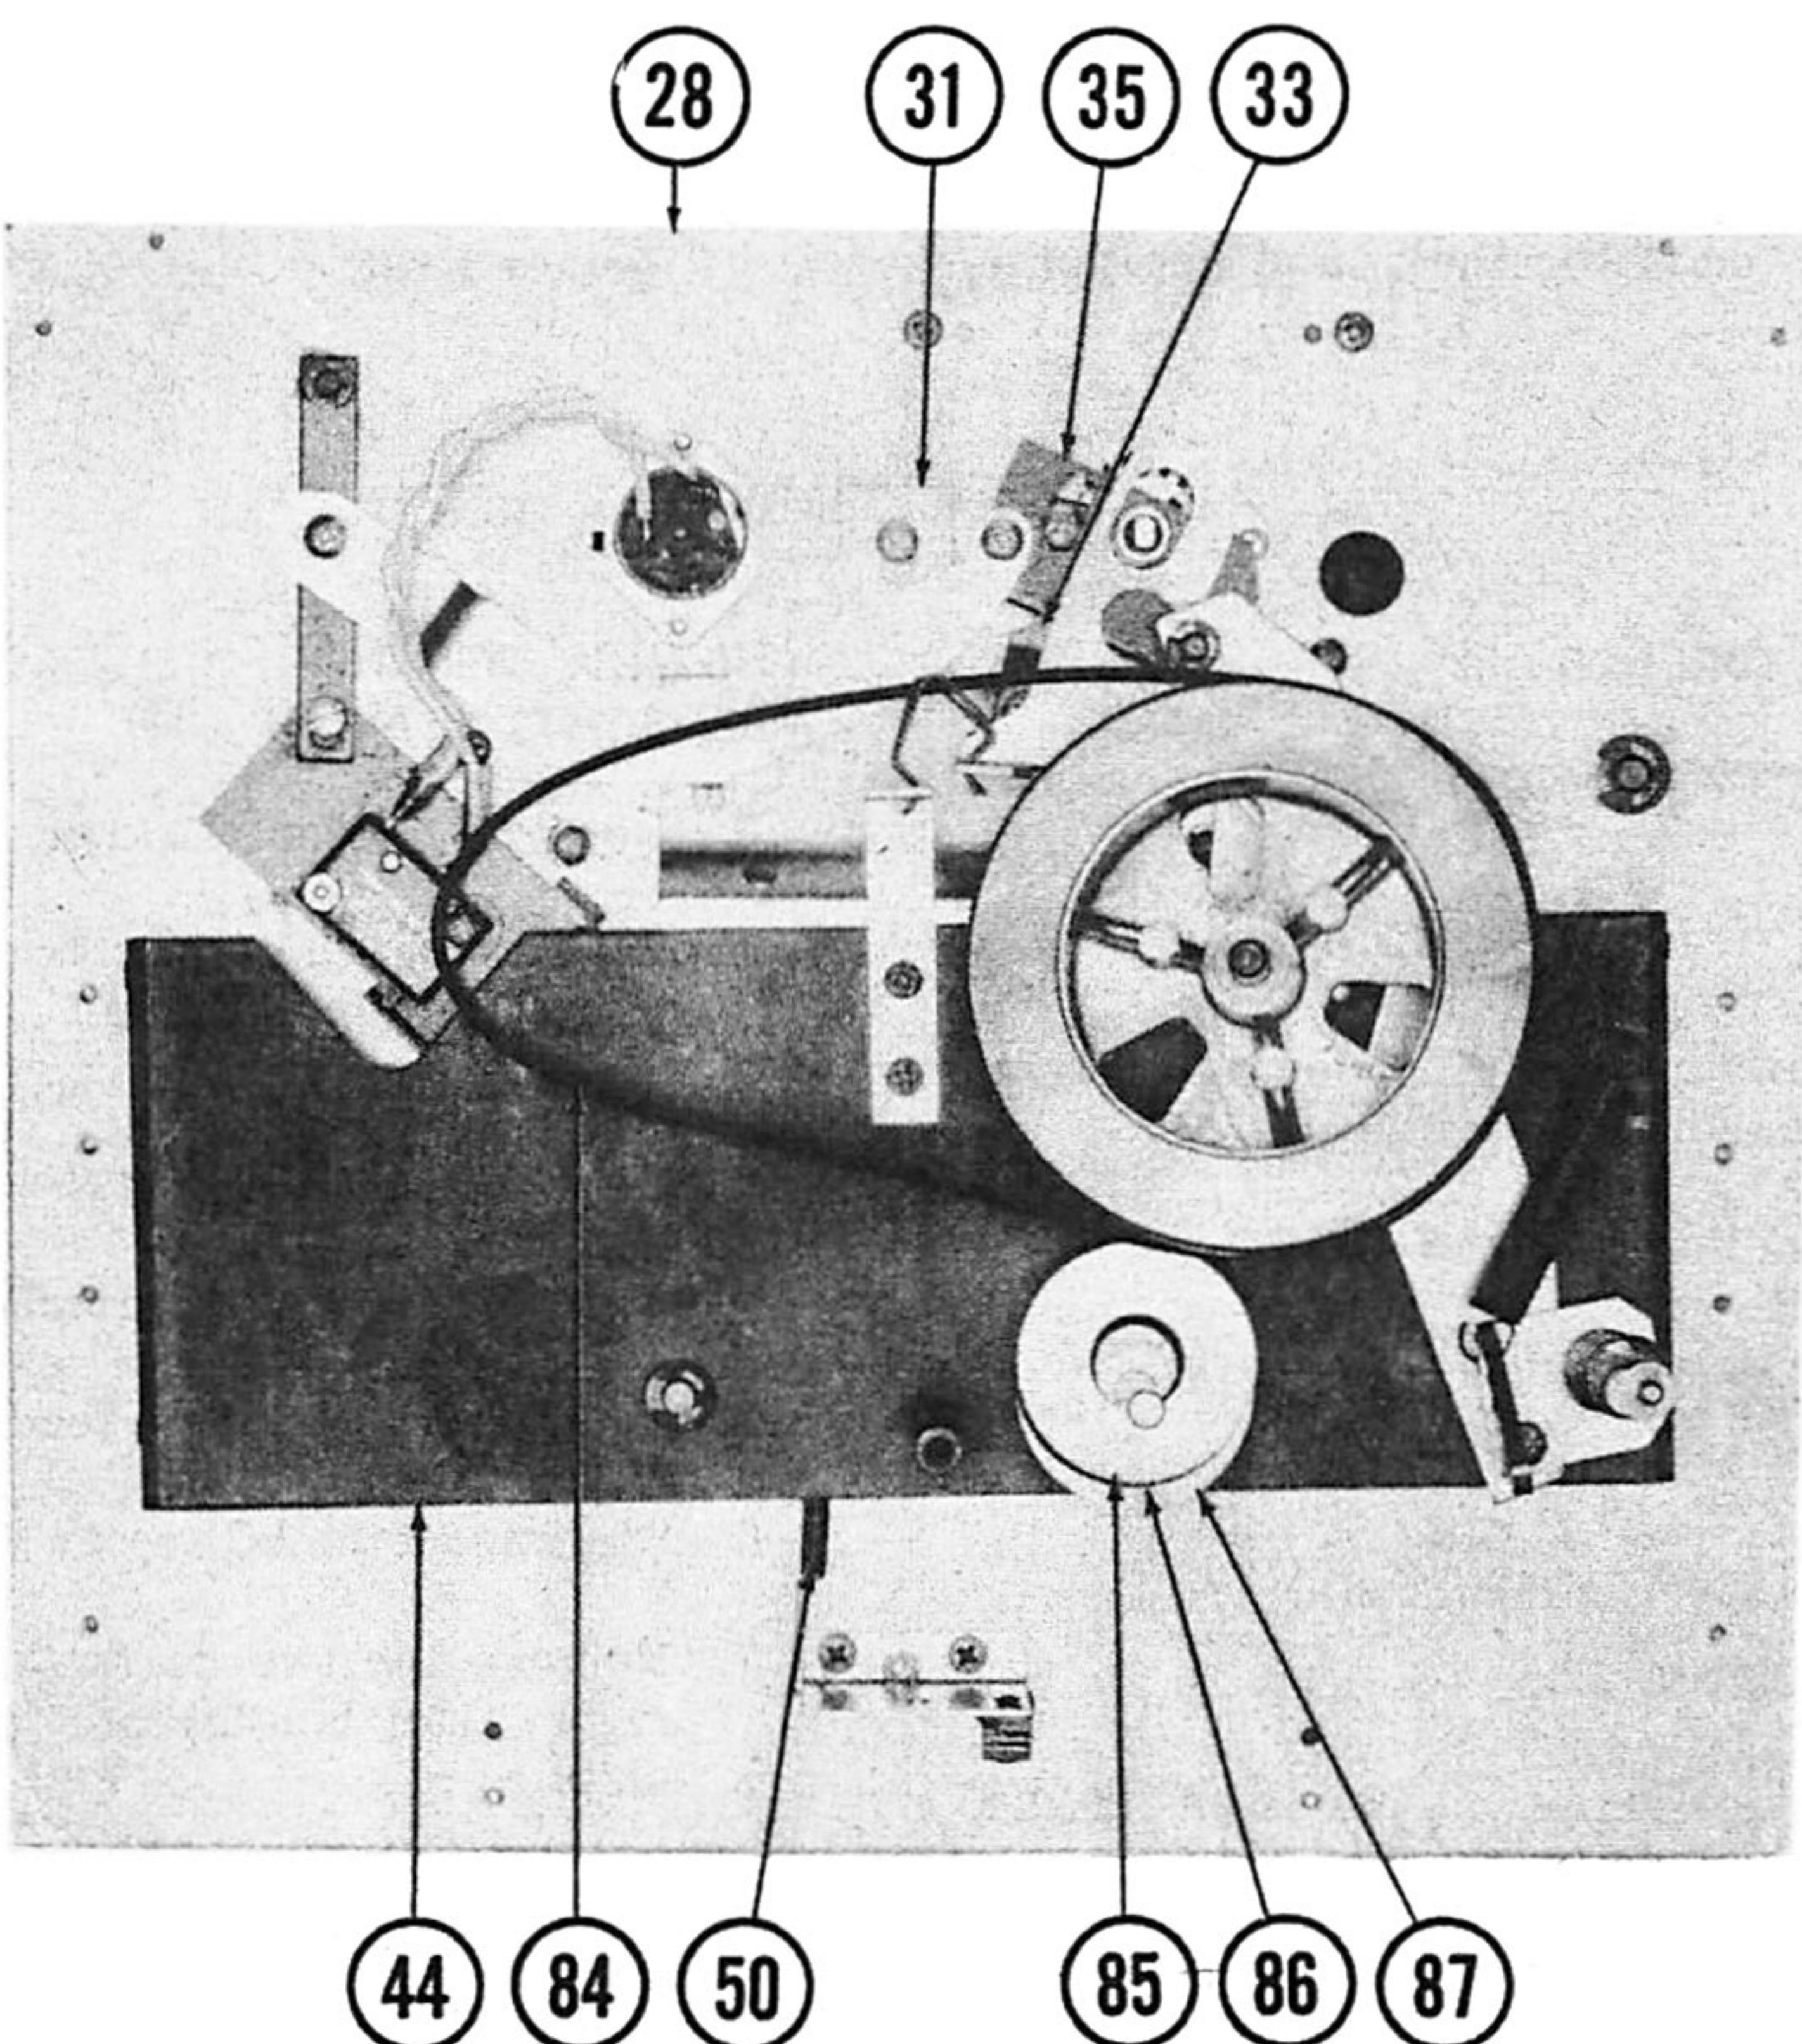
BOTTOM VIEW OF MECHANISM WITH BOTTOM OF SUB DECK REMOVED
